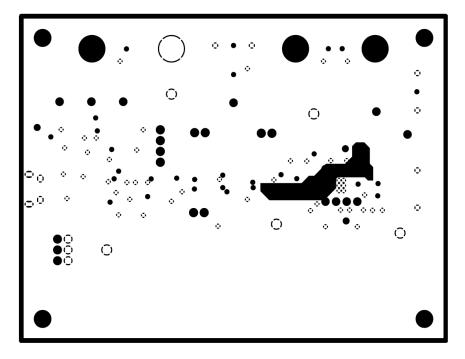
DAC8811EVM PCB Top Layer Layout
